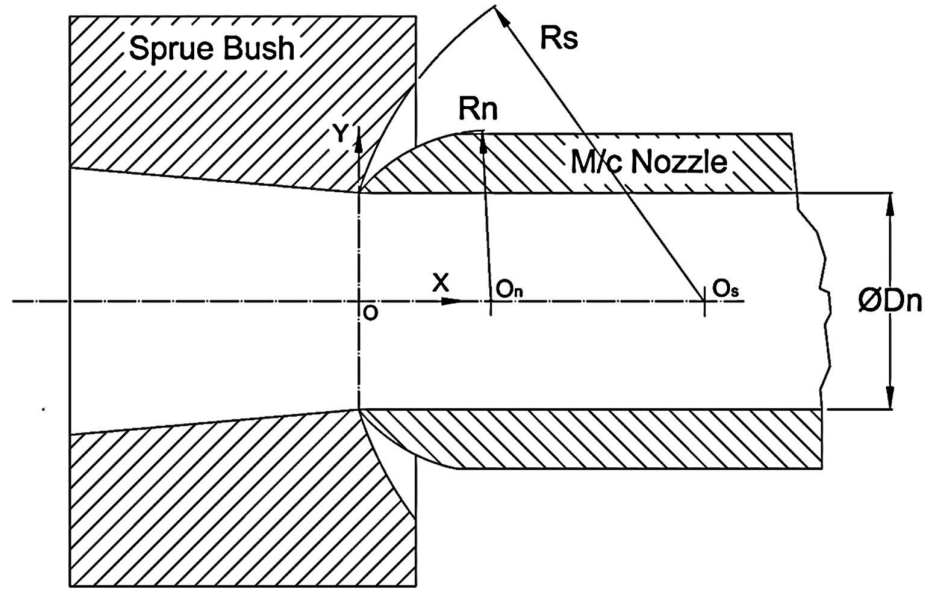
Mould sprue-bush to machine nozzle-tip engagement design.
